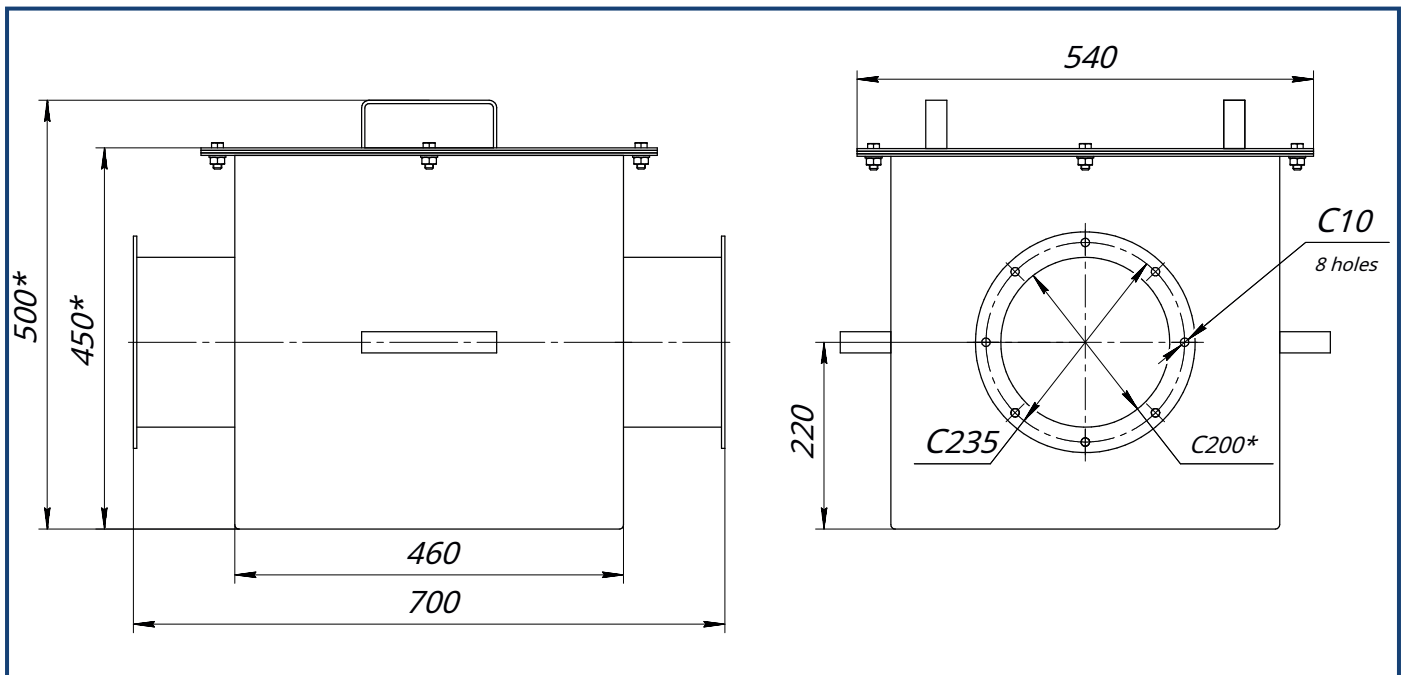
Overall and connection dimensions of the packet filter PFB-1000
